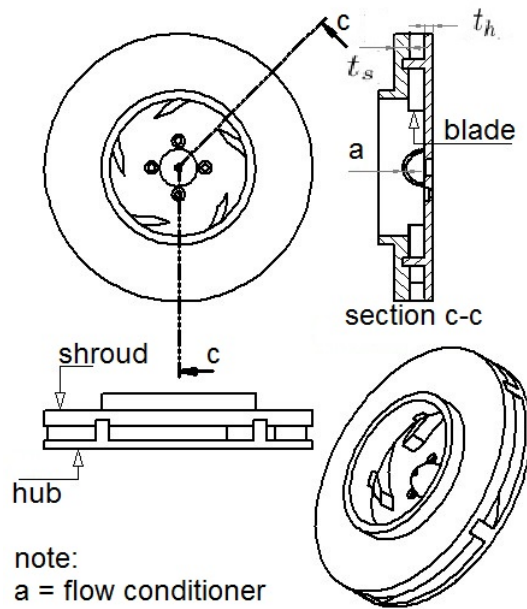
Cross section and impeller assembly for number of blades $Z= 5$
